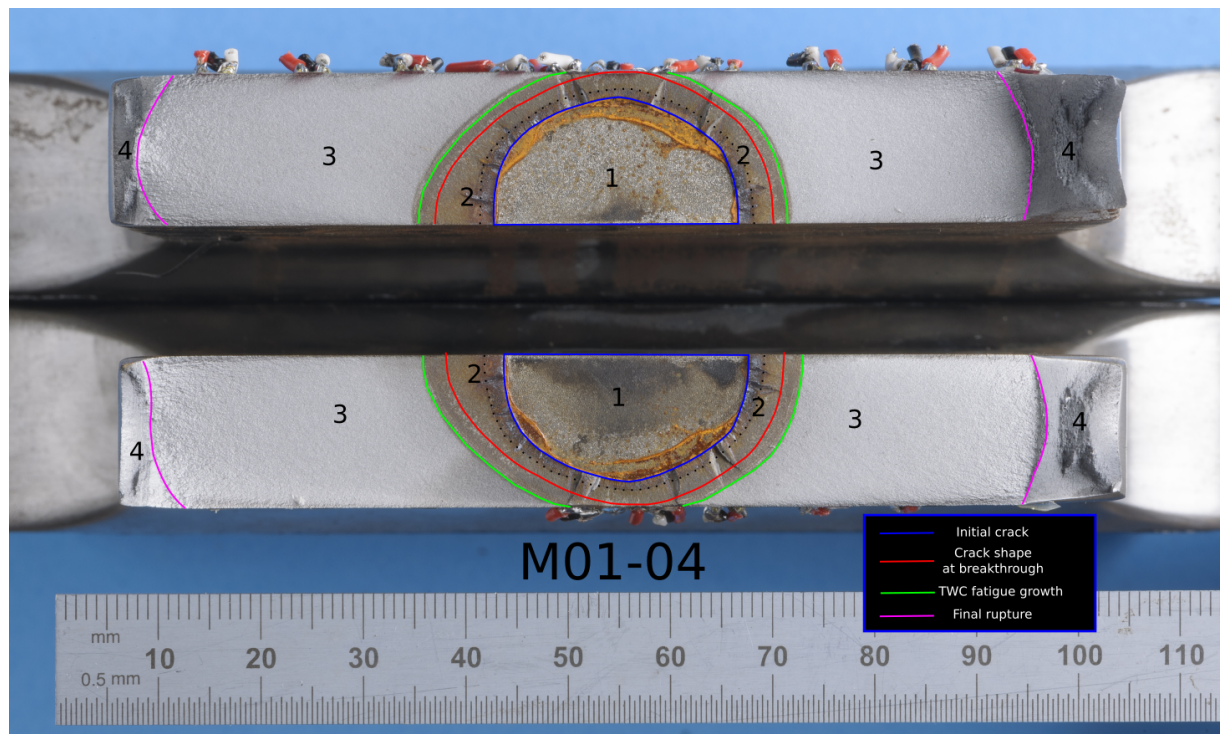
Test on high strength steel plate - Fracture surface - Sample M01-04
